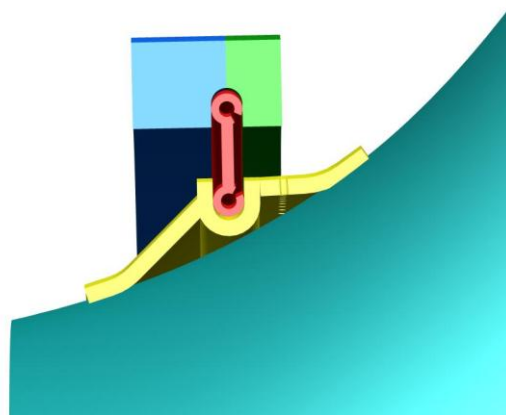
Cross section of the grooves in the frame and transition duct. The red flange is also showed in the picture.
